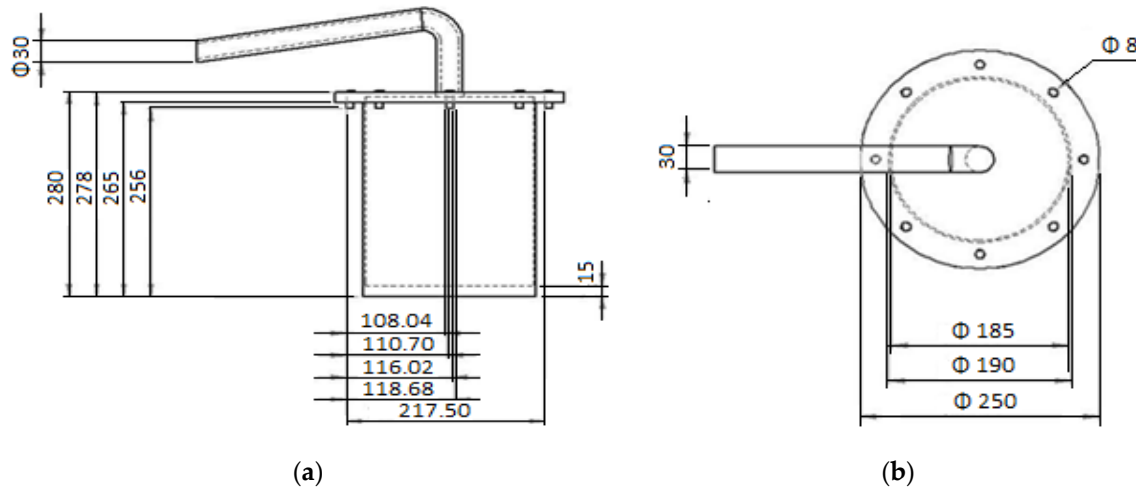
Cylindrical oil tank with dimensions in mm, (a) front view and (b) plan view (Adapted from [23]).
